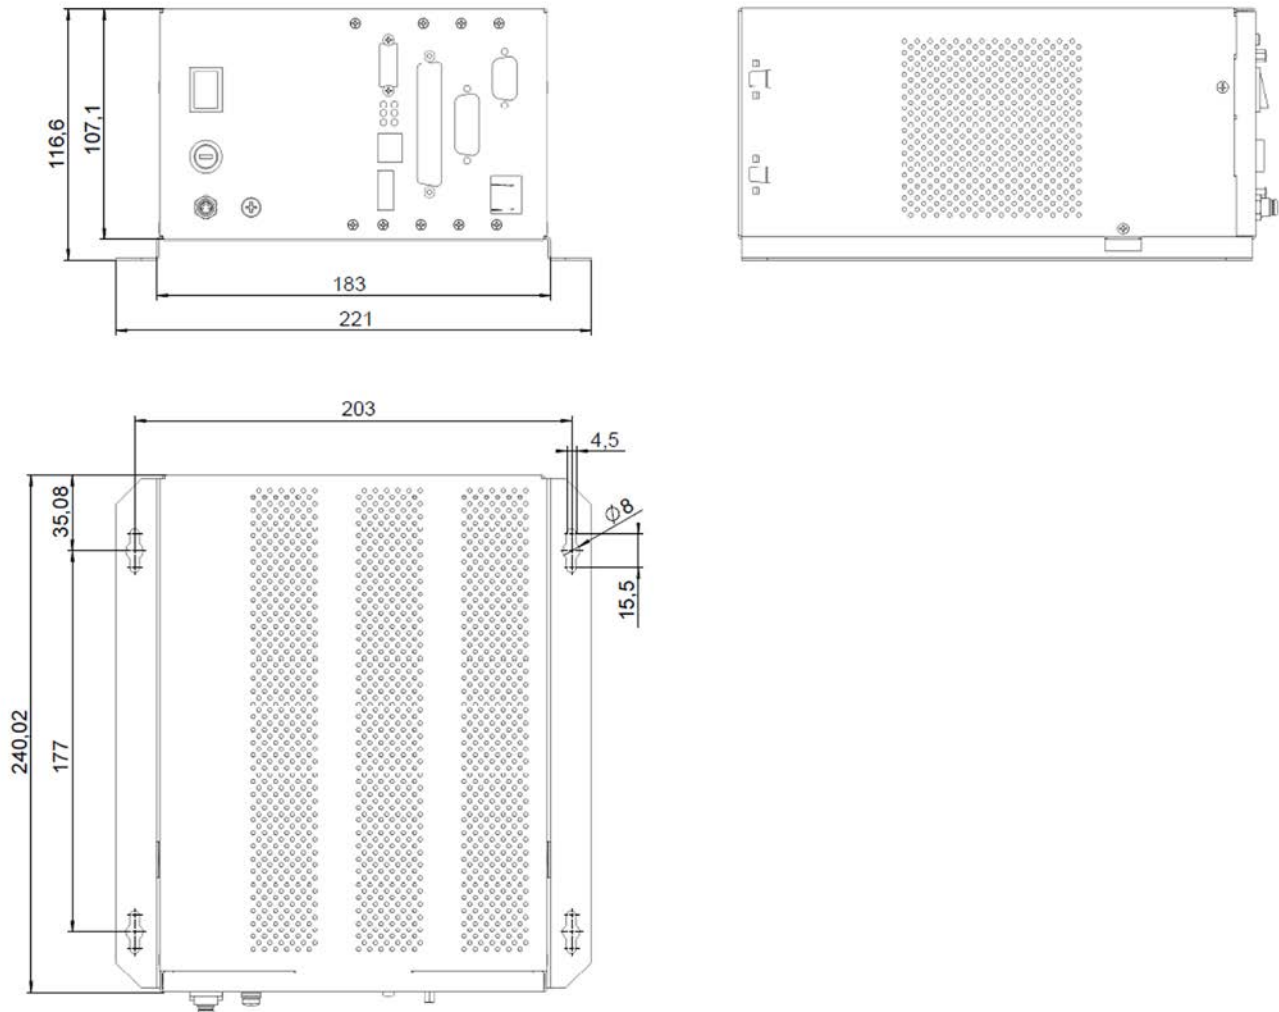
Dimensions of models E-727.xxx, .xxxA, .xxxF, .xxxAF
